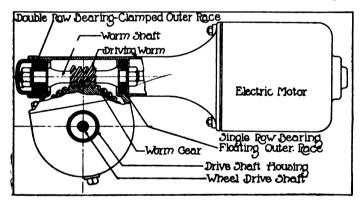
Combined Power Producing and Driving Element Using Ball Bearings to Support Worm Shaft.
